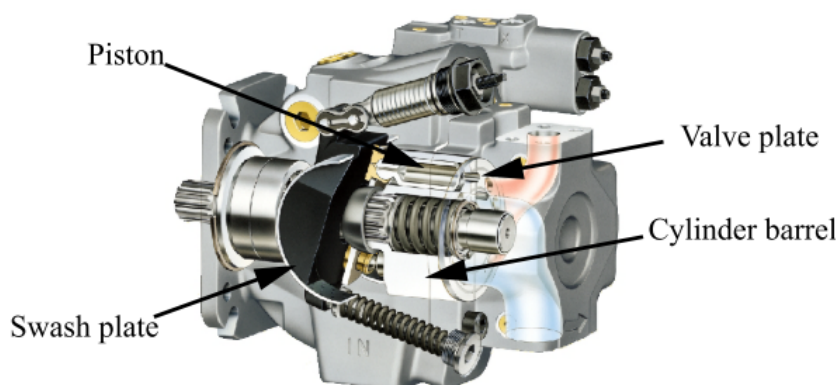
Axial piston machine of in-line type. Picture source: [21].
